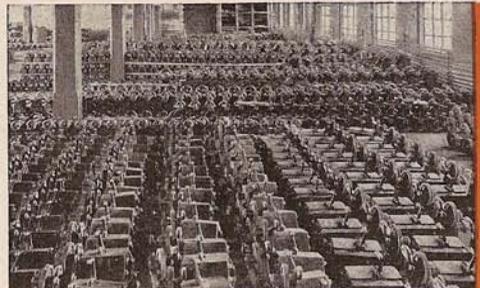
Headstocks, Tailstocks, Carriages, Gear Boxes, etc., in Stock Ready for Assembly.
